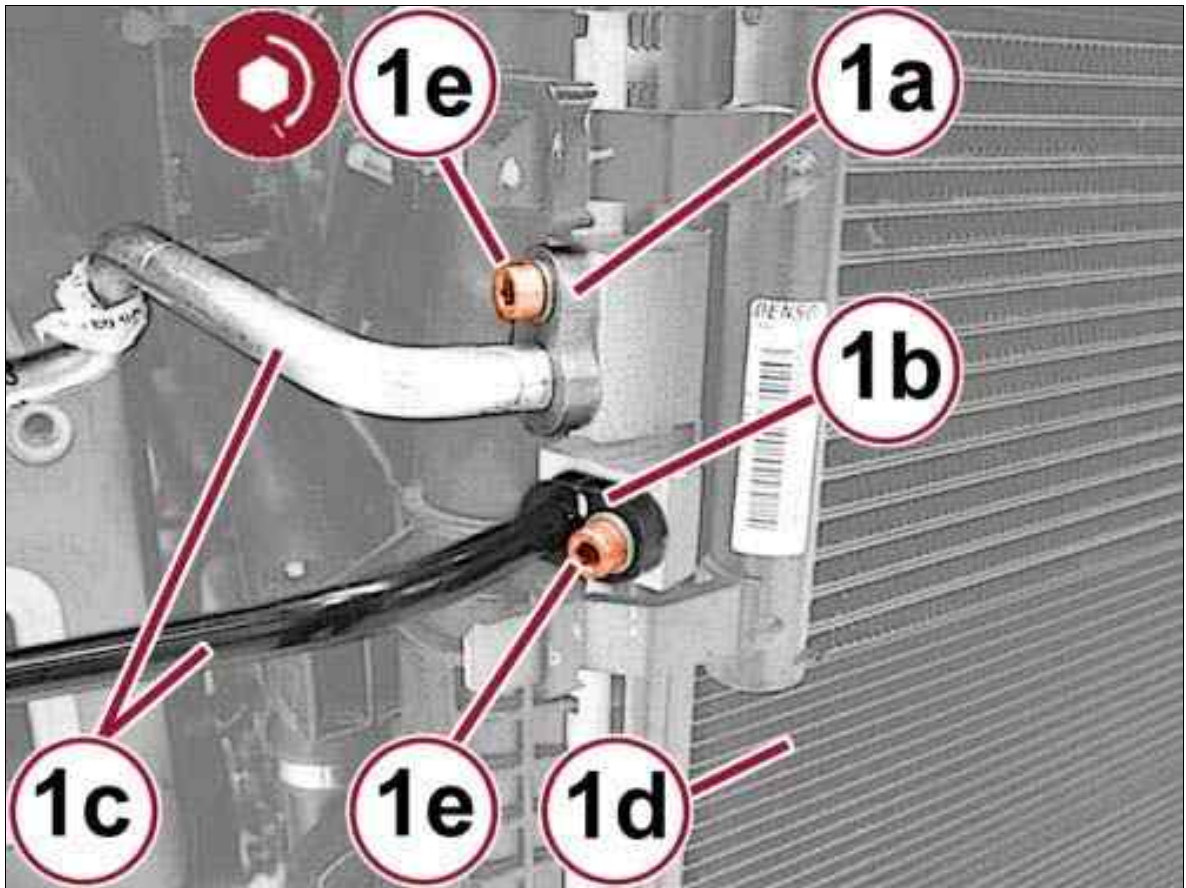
Hose, Pipe, Clamp, Quick Coupling & Spring Retainer
